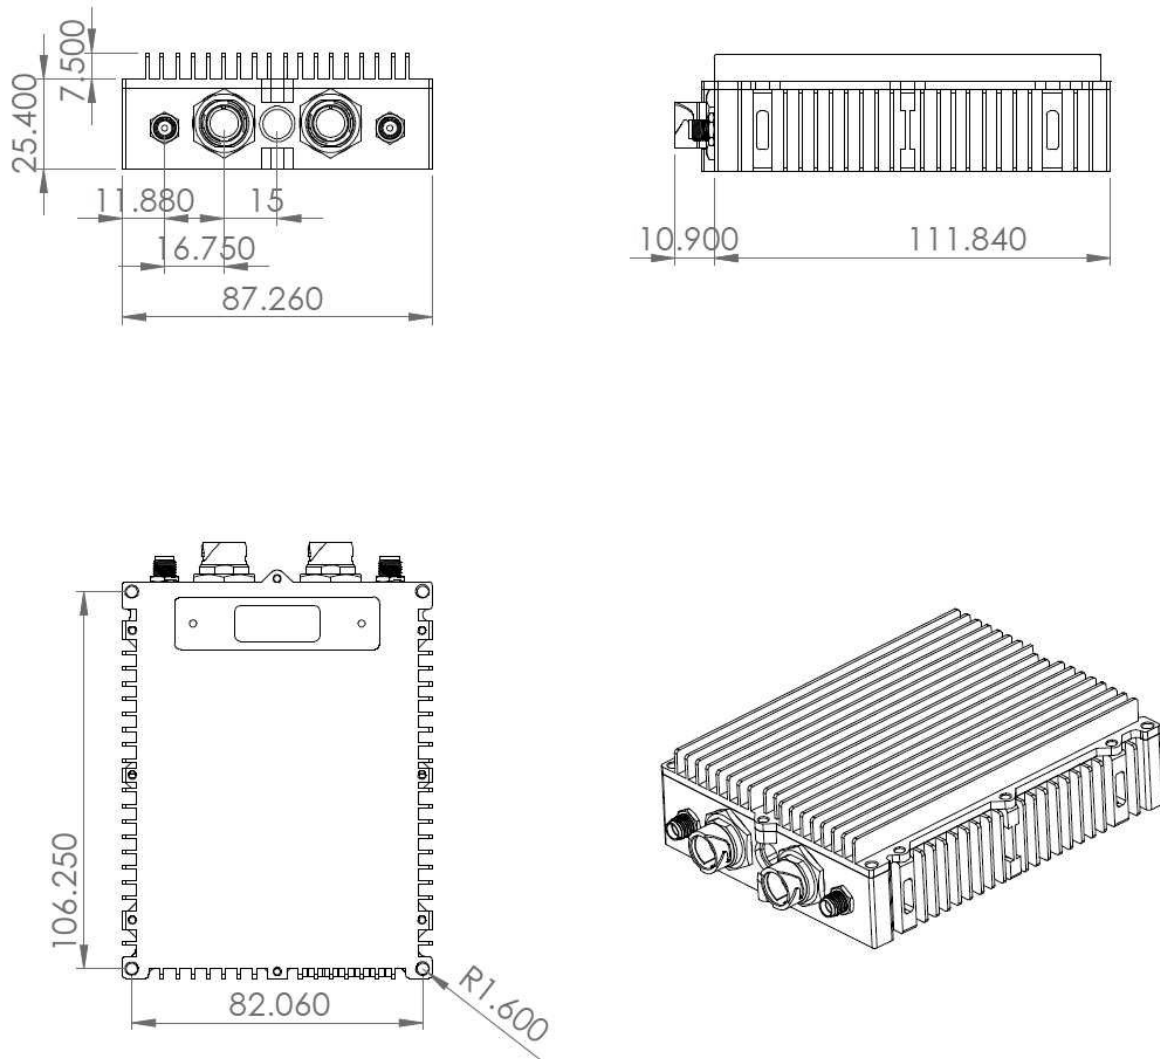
SC3822 Mechanical Drawing (top) and Mounting Pattern (bottom)
